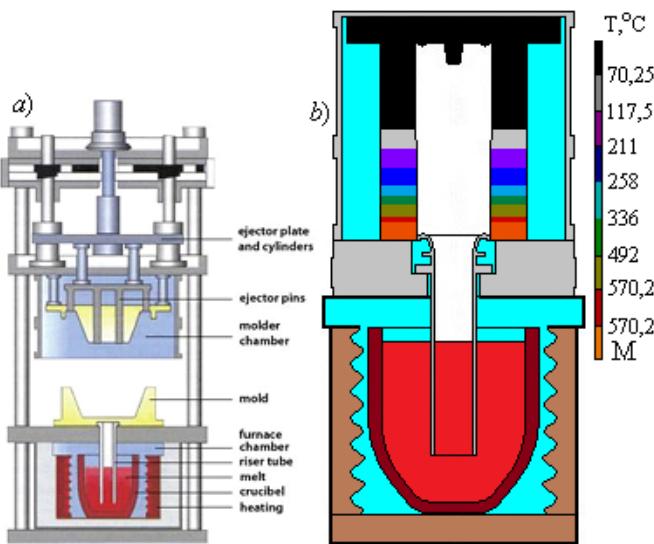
Casting technology system - Gas counter-pressure casting machine: a) General appearance of the casting machine; b) Technology for producing counter-pressure cylindrical castings. The technological regime shown (see Fig. 2 a) is obtain with initial temperature of the mould without taking into account the filling process.
